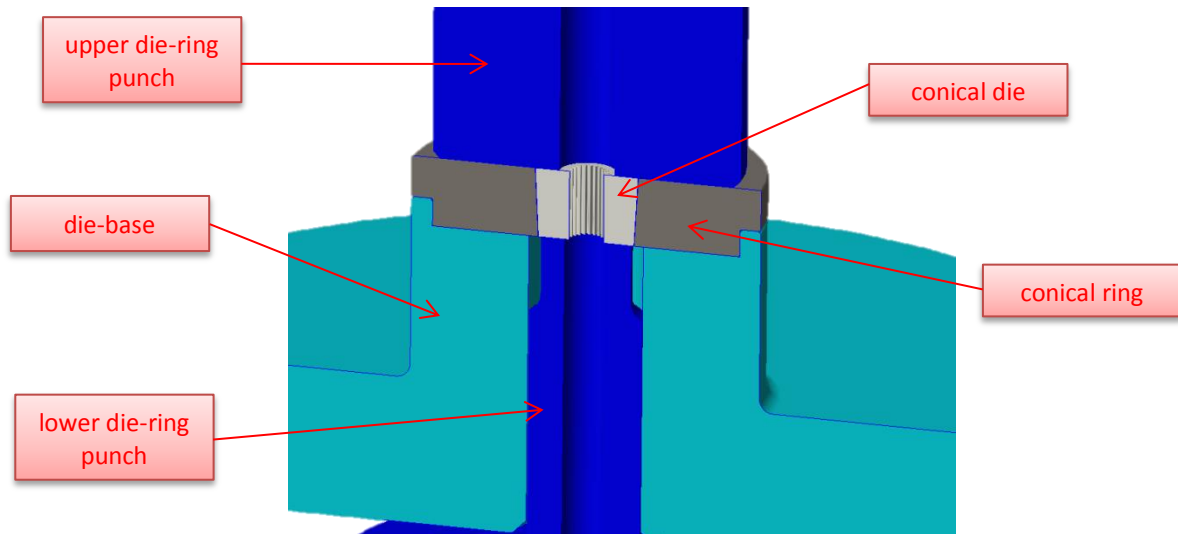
Schematic 3D cad related to the die-ring assembly during sintering.
